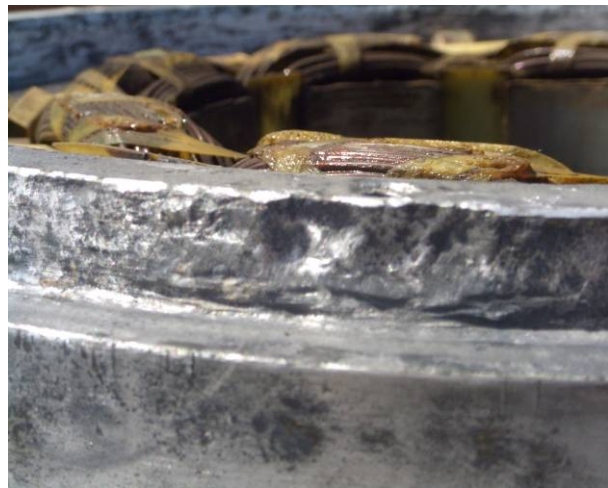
Deposits and pitting corrosion on the bearing housing
